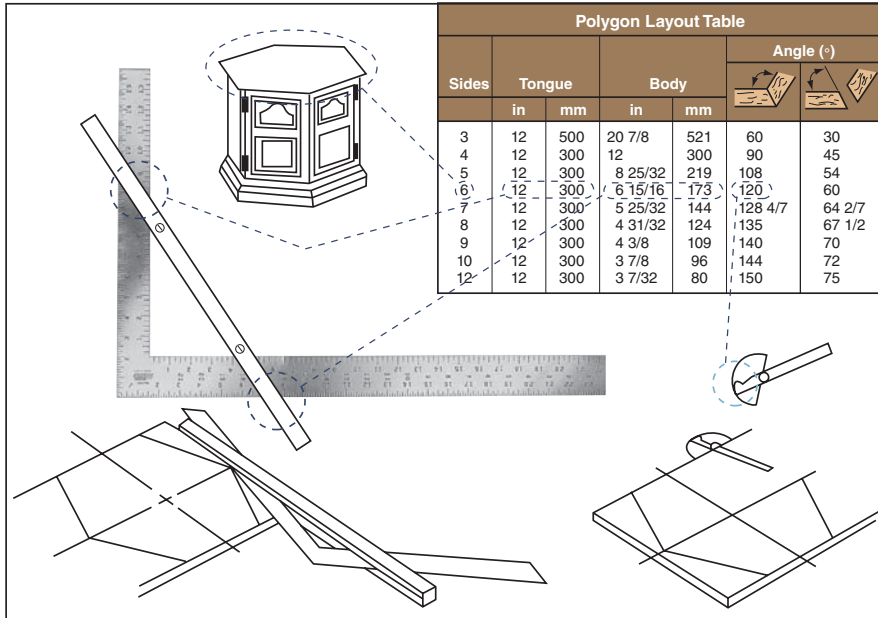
A protractor or framing square and straightedge may be used for polygon layouts.
